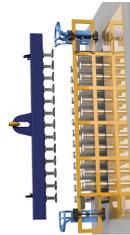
Lifting yoke over extrusion ingots and guide cradle.
